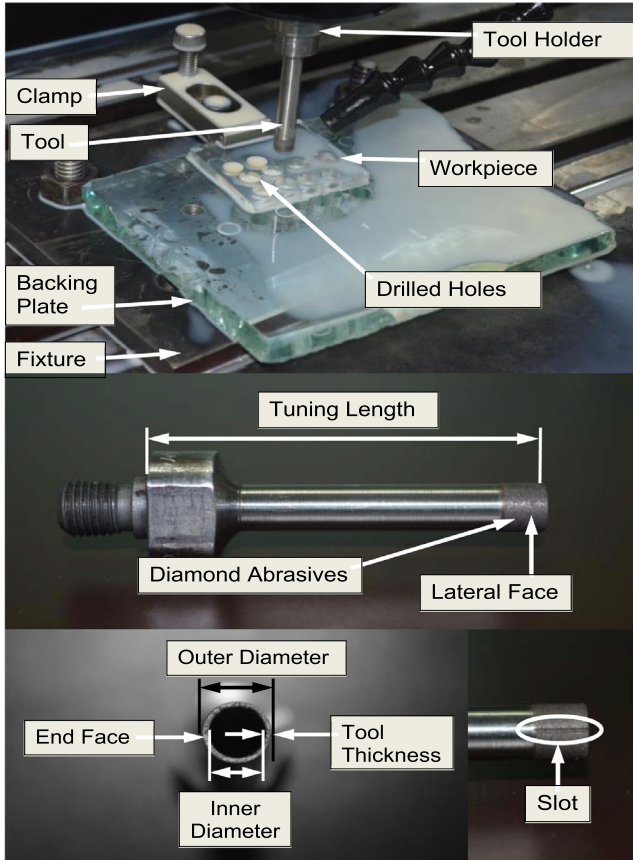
Enlarged view of machining zone and tool nomenclature.
